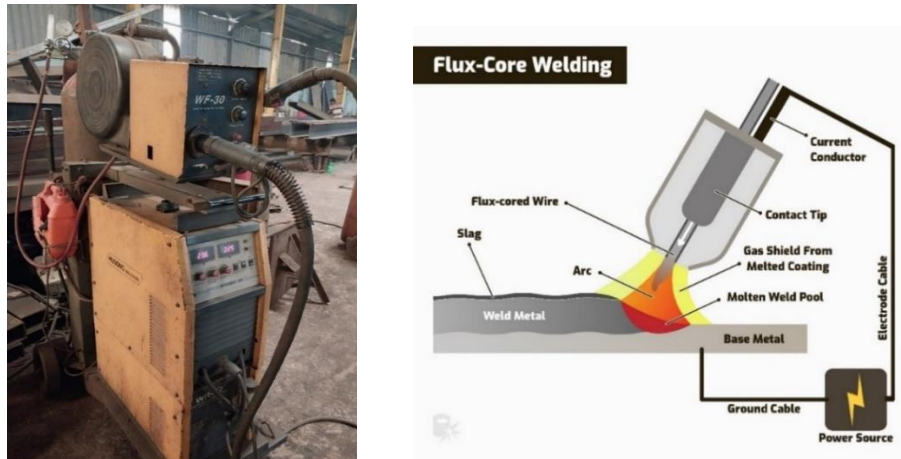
Flux cored arc welding (FCAW) (Sild, 2022a)
